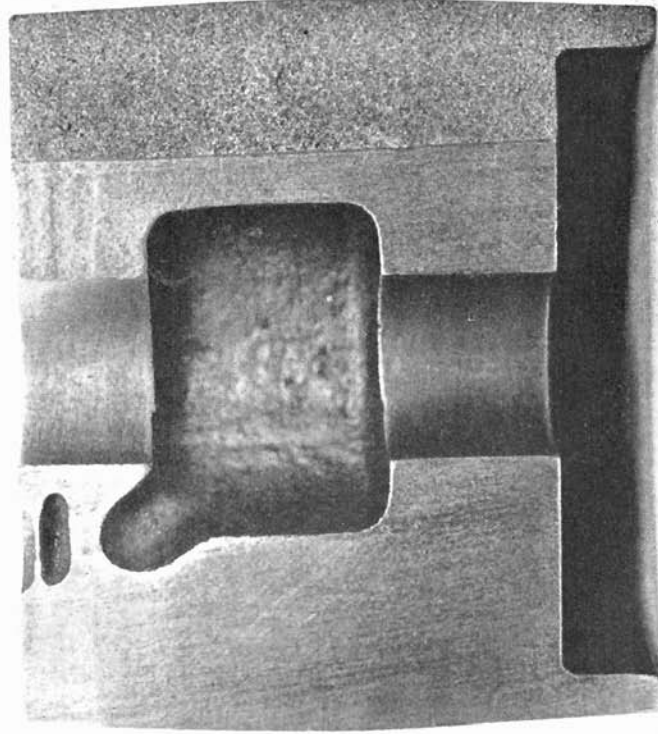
Large blowholes produced in a grey-iron pulley wheel casting by gas evolved from a core.
